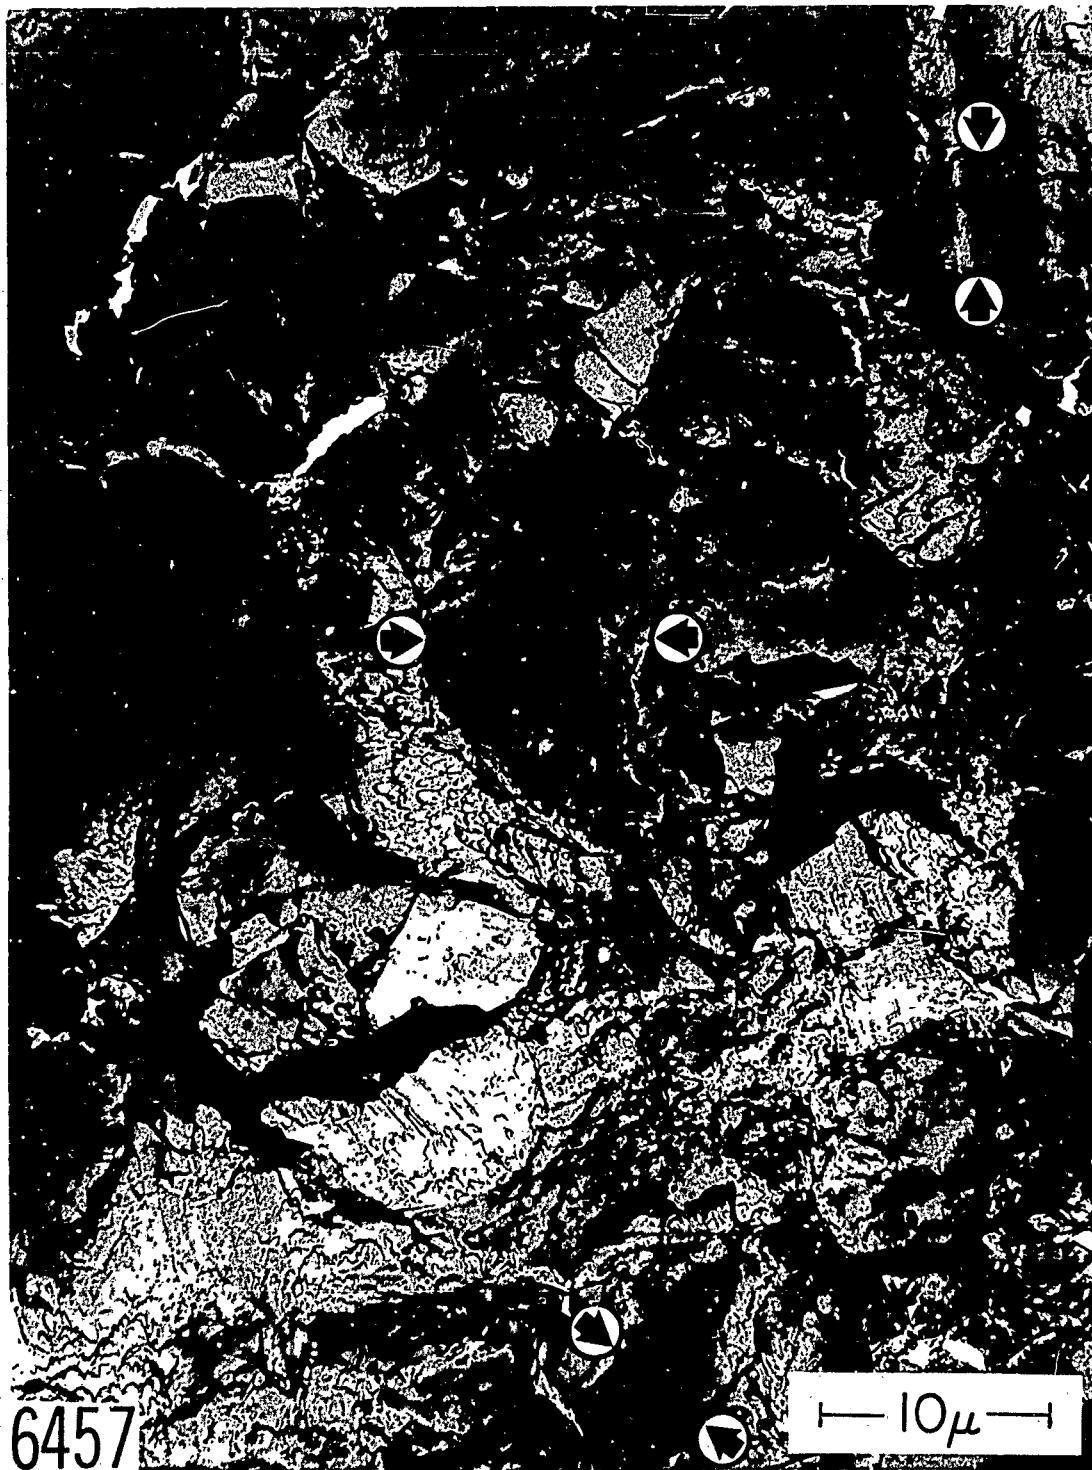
Lower magnification view of fracture surface below surface crack. Flat regions (examples shown between arrows), that are probably intergranular facets, are mixed with dimples. Again this is typical of simple overload plane strain fracture in 4340 steel with this heat treatment. Two-stage palladium-shadowed carbon replica. 3600X.
